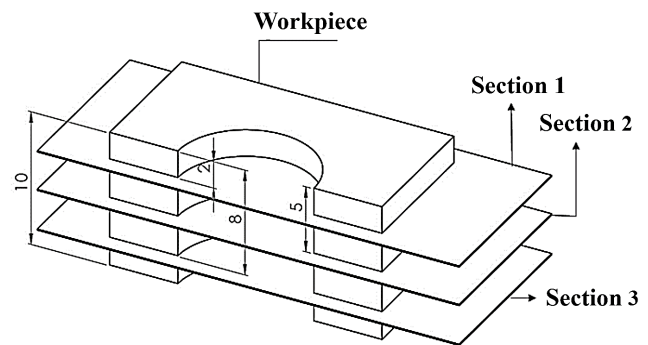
Sections of the workpiece where the geometrical and dimensional tolerances were measured
